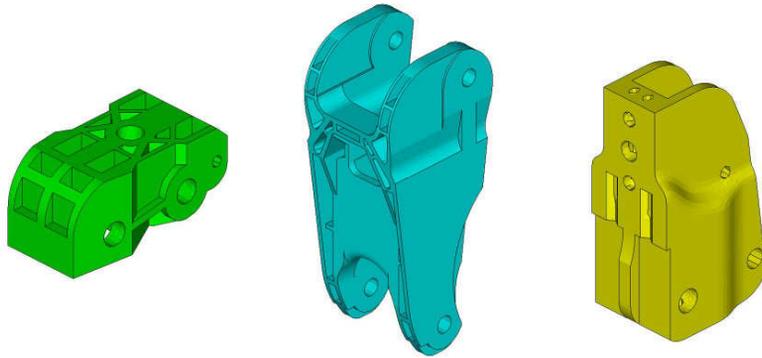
Simplified optimized geometry in CAD format: (a) Top, (b) Body, and (c) Bottom.
